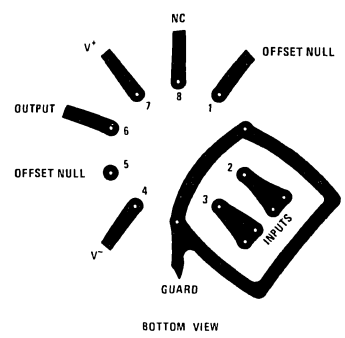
Printed Circuit Layout for Input Guarding with TO-5 Package
